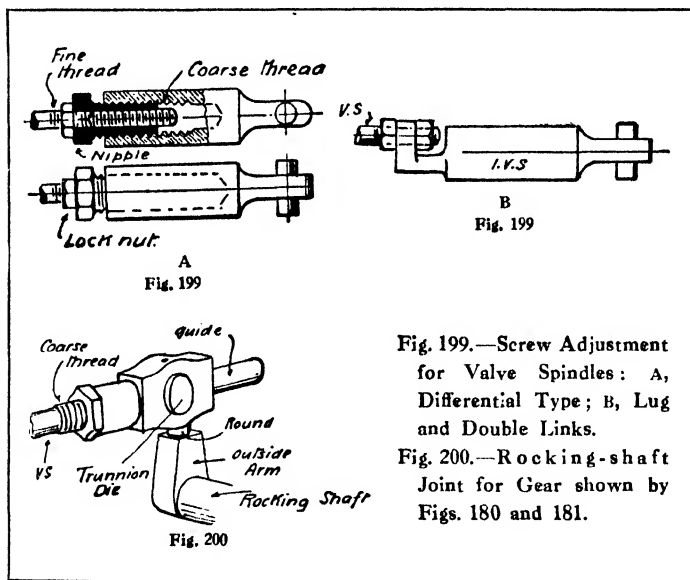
Screw Adjustment for Valve Spindles: A, Differential Type; B, Lug and Double Links.
